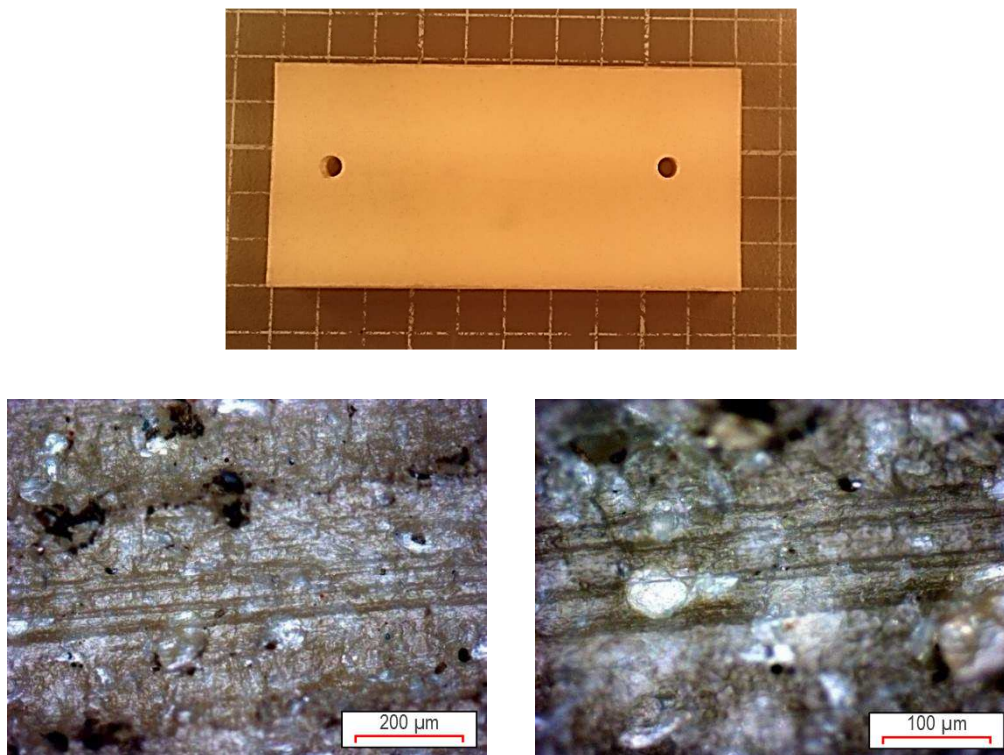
Sample I before testing. Top: Machined bearing pad. Bottom Left and Right: Irregular surface produced during machining
